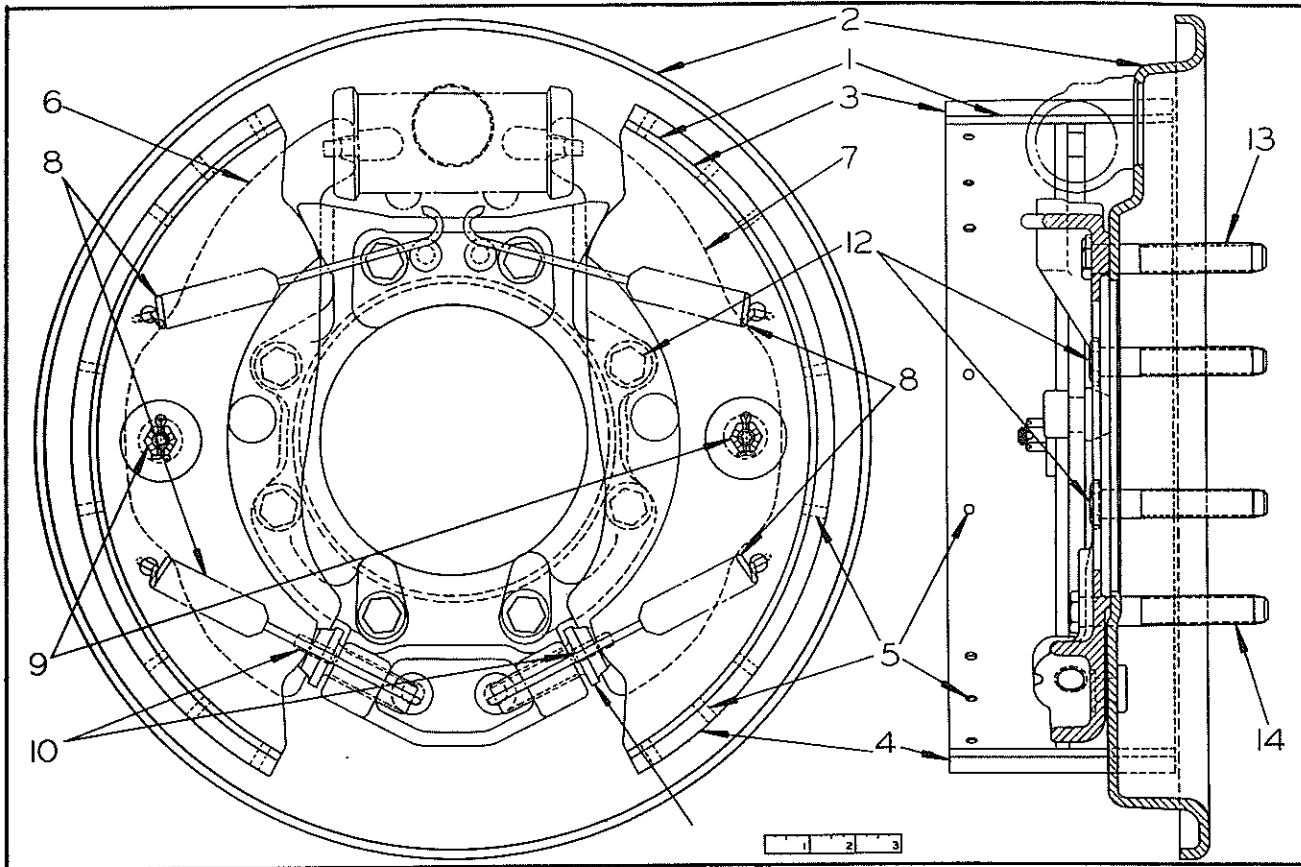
BRAKE ASSEMBLY (FRONT AXLE) LEFT AND RIGHT
